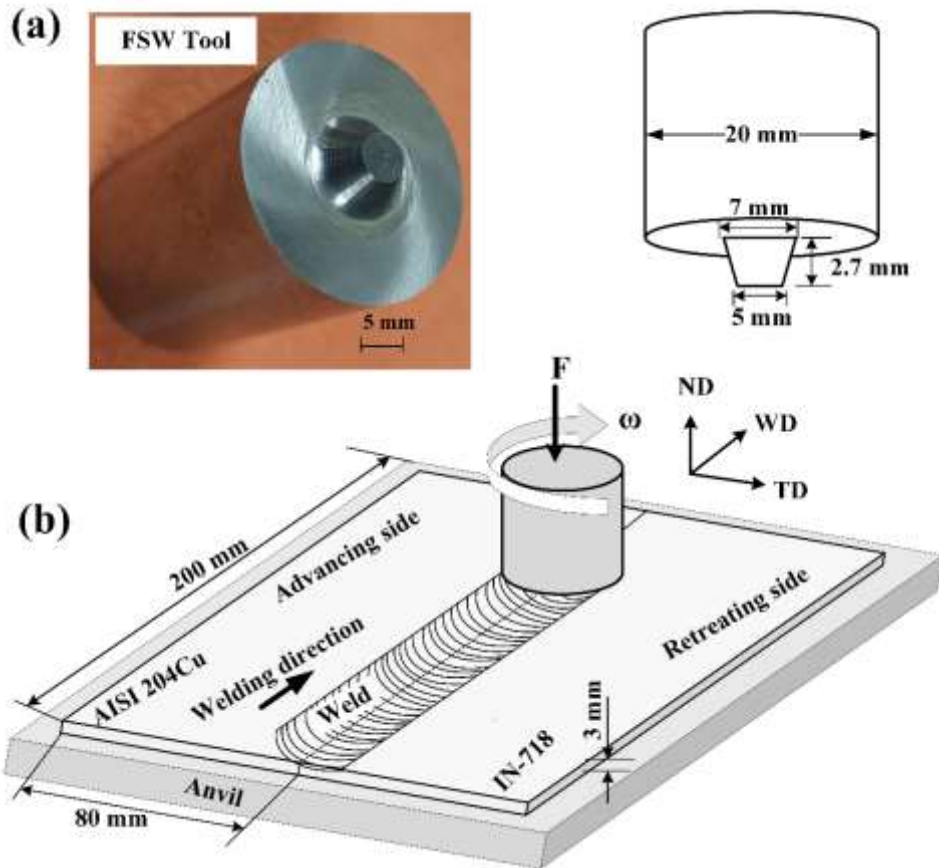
(a) FSW tool and its schematic view and (b) Schematic diagram of FSW process.
